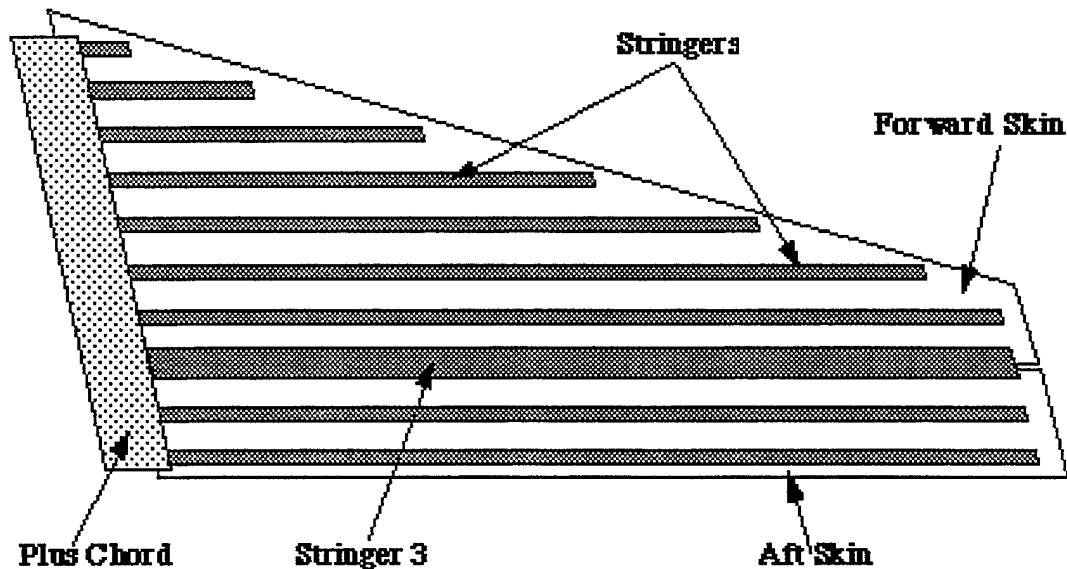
Schematic of a horizontal stabilizer skin panel assembly.
